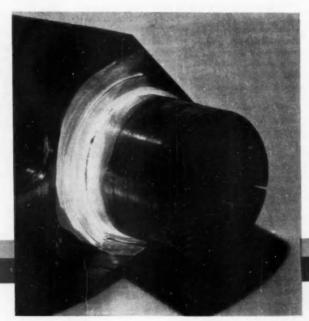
This crankshaft has a bad crack which is made obvious with dye penetrant.
